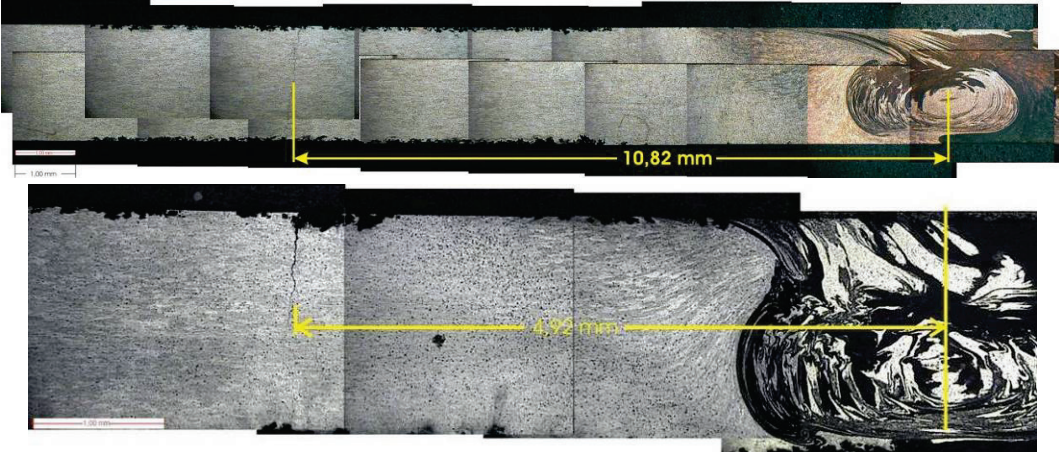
Location of the fatigue crack in pre-corroded dissimilar FSW 2024A/6056 joints (upper) in “as welded” and (lower) in PWHT conditions
